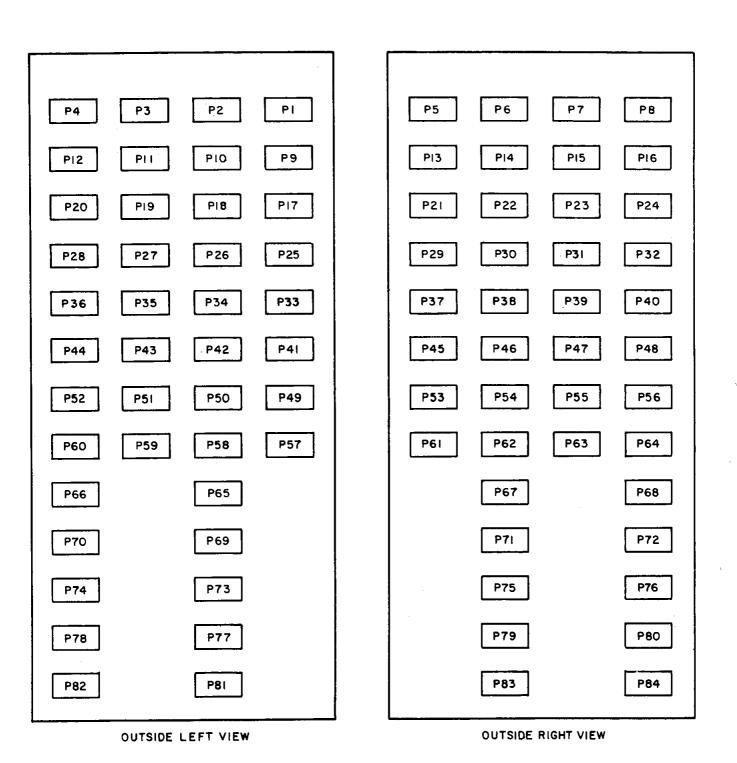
Interassembly Plug Rack, Diagrams of Plug Location
